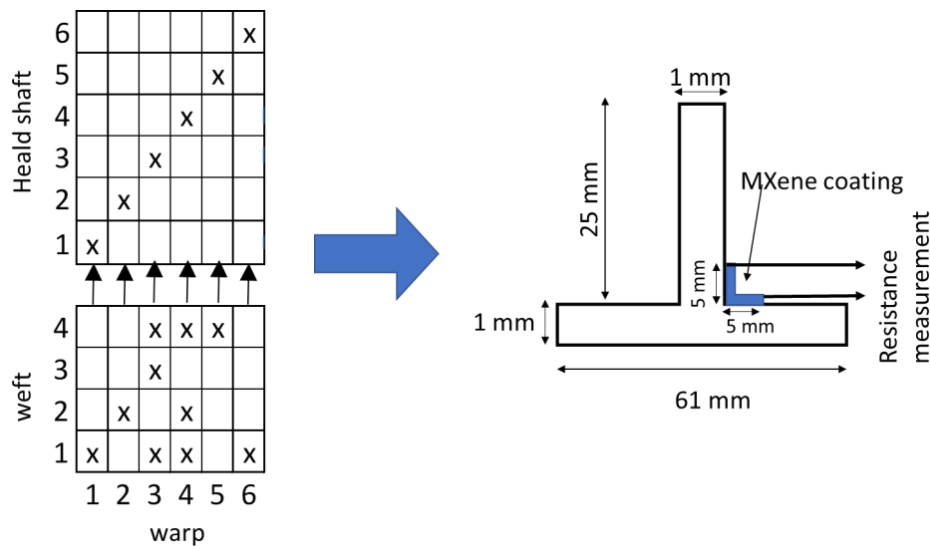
3D woven composite T-profile: (a) Weave design and draft; (b) Sample dimensions and resistance measurement scheme
